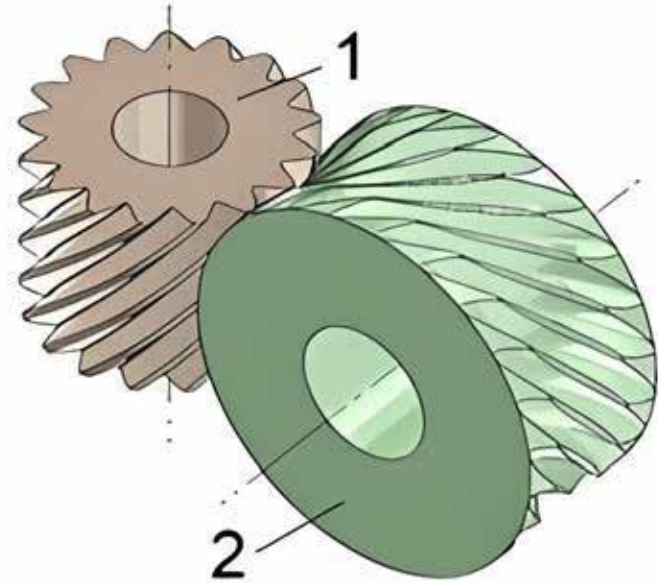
Enveloping crossed axis helical gear pair; 1 – helical pinion, 2 – enveloping helical gear
